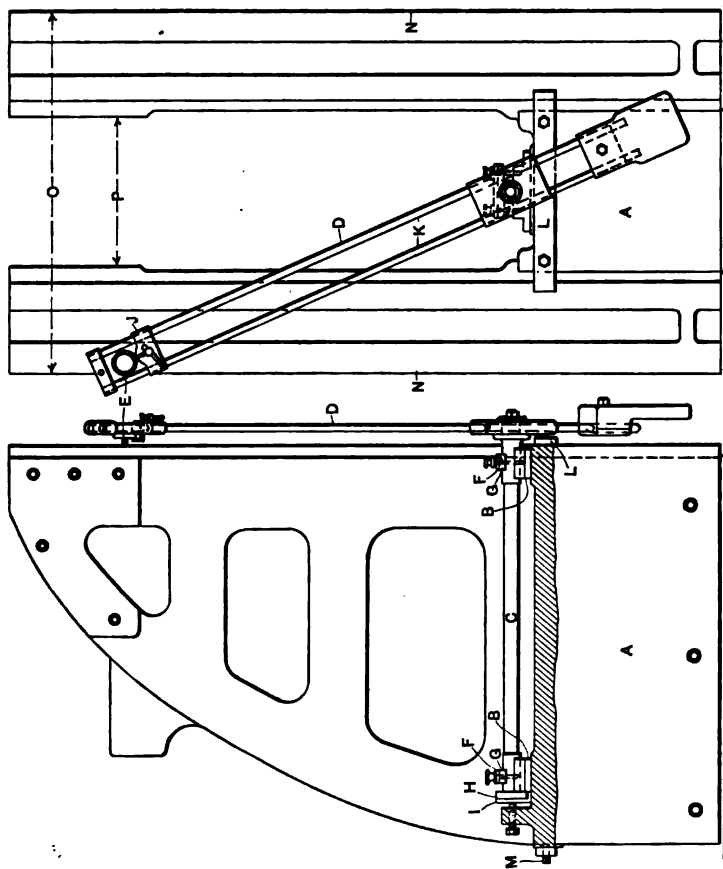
Special Fixture used for Testing Alignment of Housing Faces, provided with Sweep for Carrying Starrett Indicator
